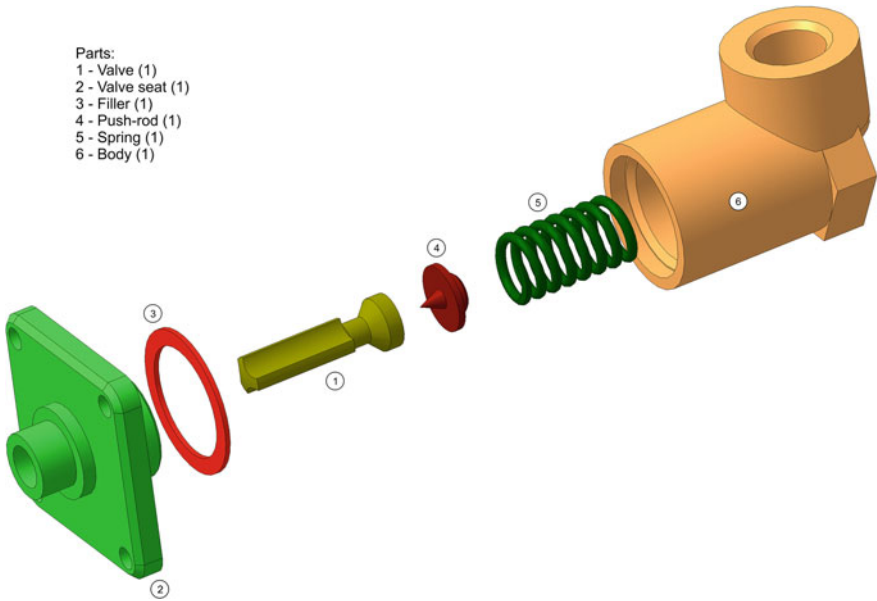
Valve pneumatic apparatus (exploded view)
